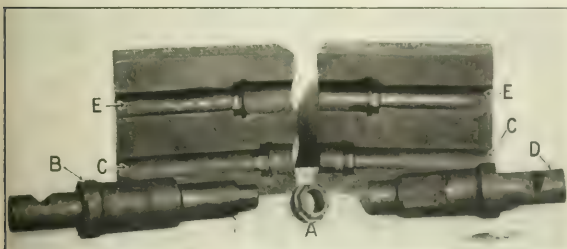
Dies and Formers for Forging Valve Seat for Air Pump.
